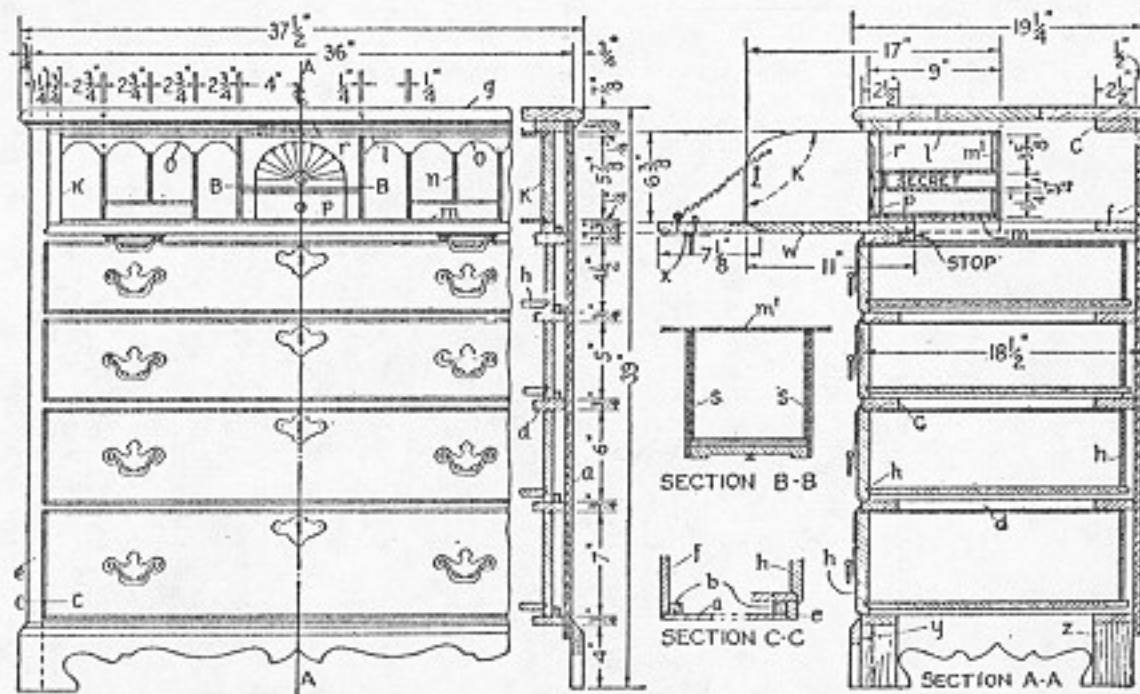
Front view of the chest partly broken away to show a section through the end; a sectional view through the center from front to back showing drawers and desk slide.
